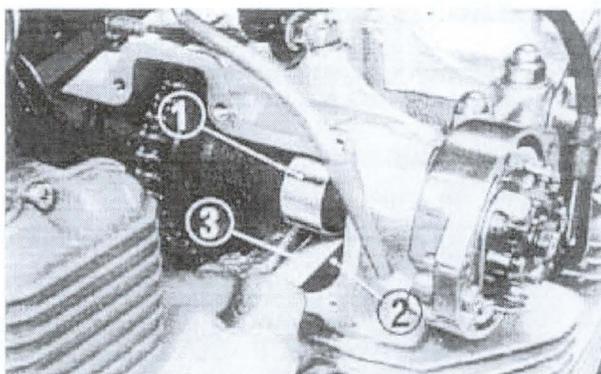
(1) Cam (2) Cam follower (3) Feeler gauge
